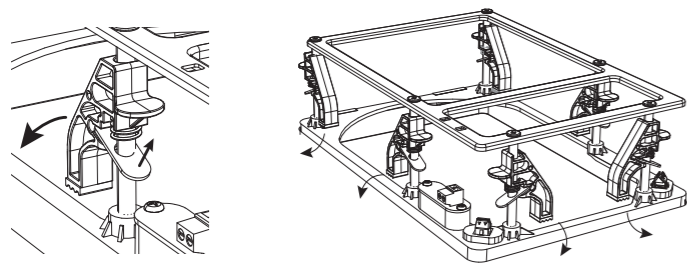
Adjusting the Mounting Clamps from the Stowed Position
